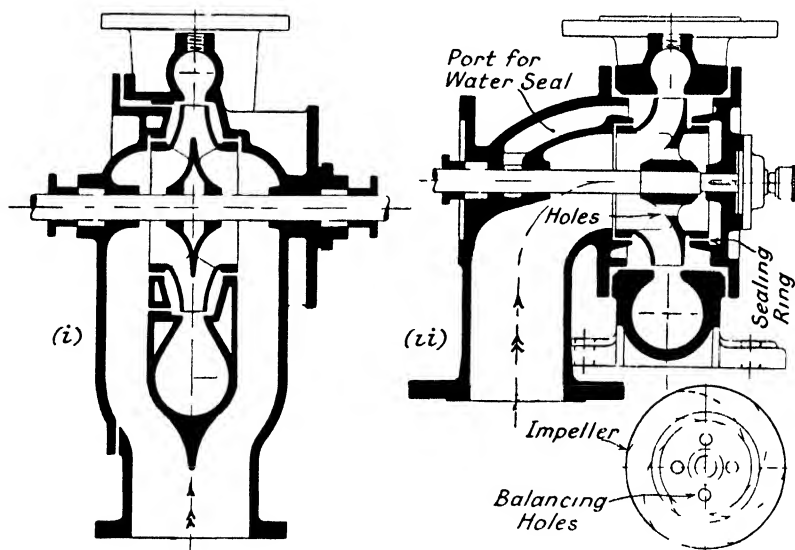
Systems for minimising axial hydraulic thrust on impeller
